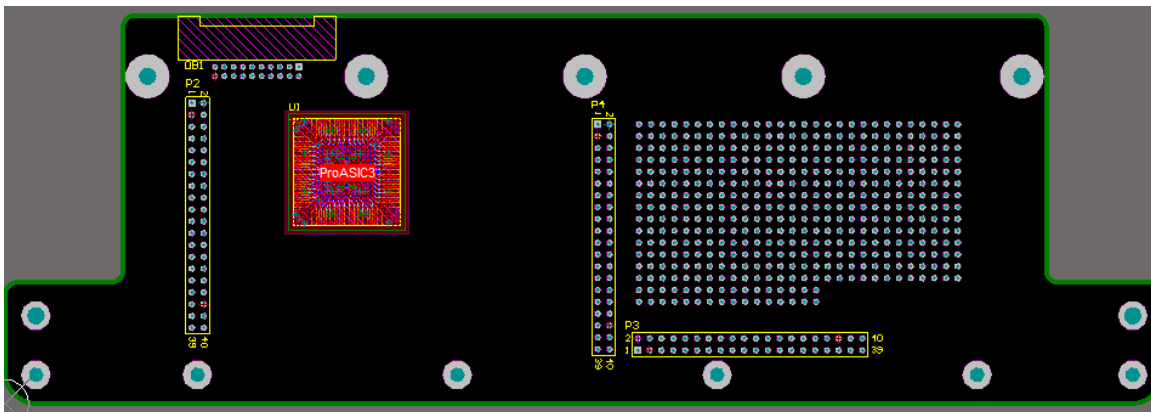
Initial 2-D PCB layout of FPGA, three 40-pin I/O headers, prototyping area, and ribbon-cable connector for relay board attachment.
